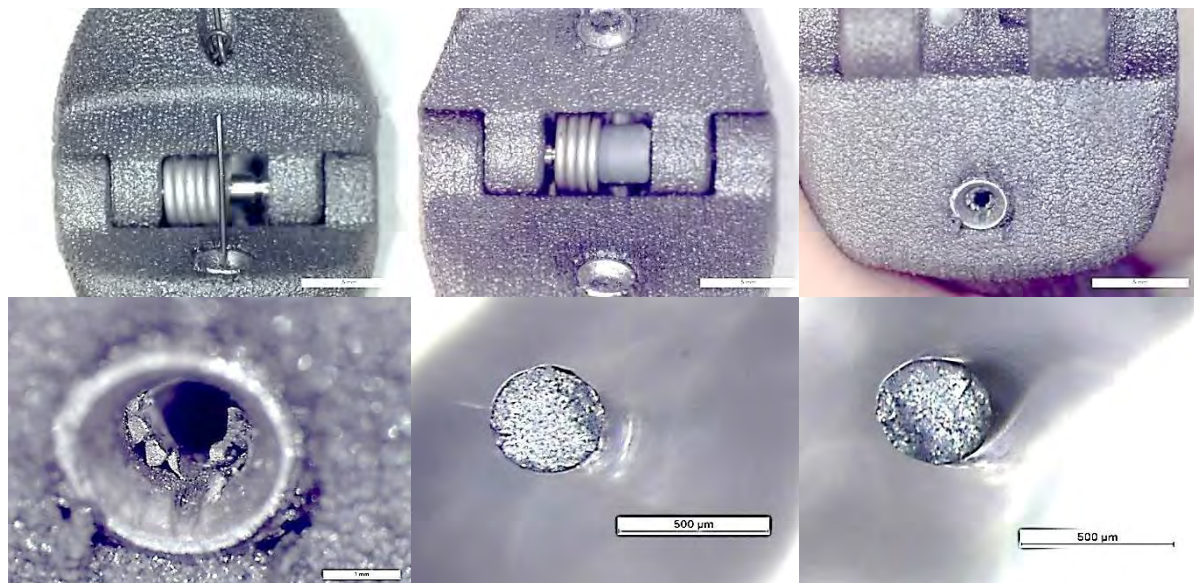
Specimen 2: DIP joint (top left), PIP joint (top centre), MCP joint (top right) with close-up of MCP prox. channel ring (bottom left) and fracture surfaces of the nitinol actuating wire both prox. (bottom centre) and distal (bottom right).
